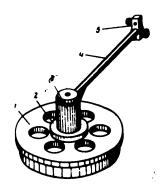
Device for Checking Play of Support Casing Shoulder
